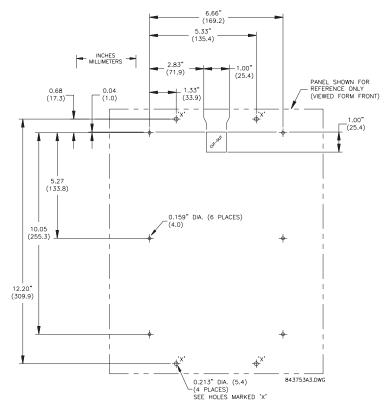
C60 VERTICAL SIDE MOUNTING REAR DIMENSIONS
